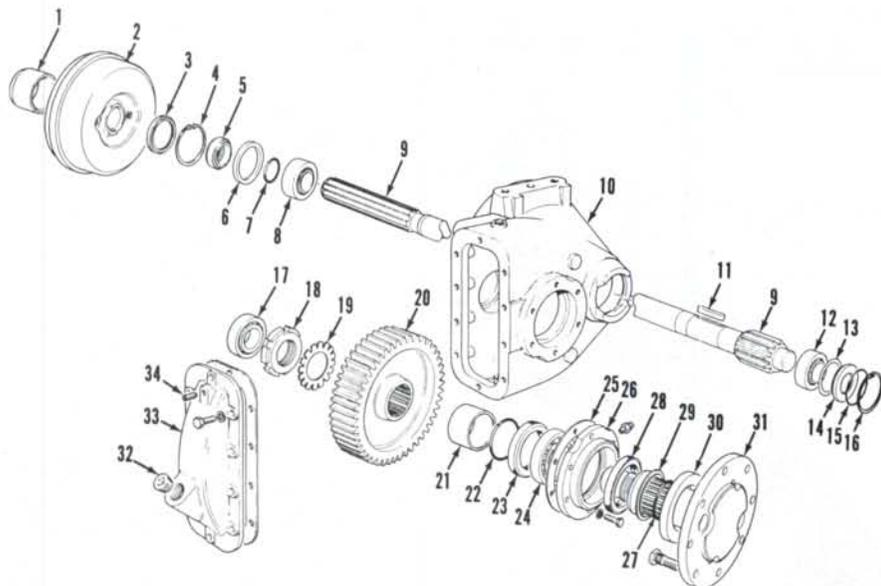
Exploded view of final drive assembly used on 1190, 1194, 1290, 1294, 1390 and 1394 models.
